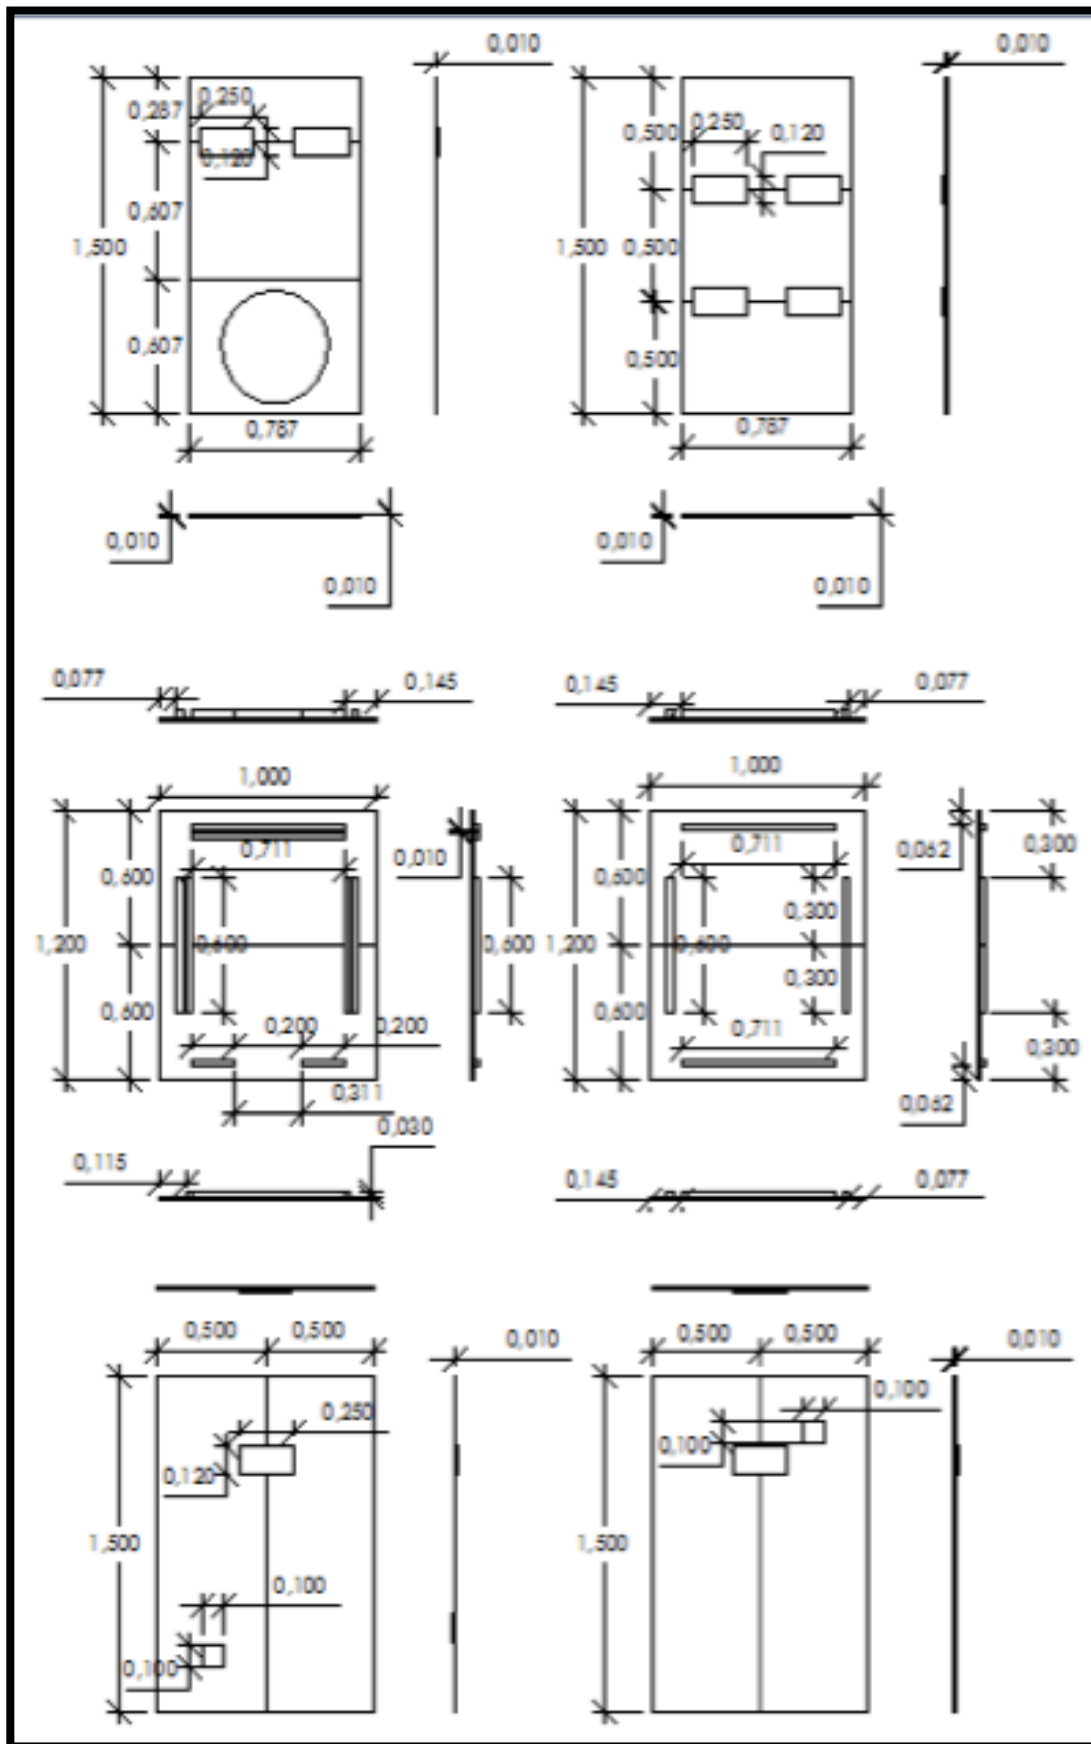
CONSTRUCTION PLAN OF THE MODEL
